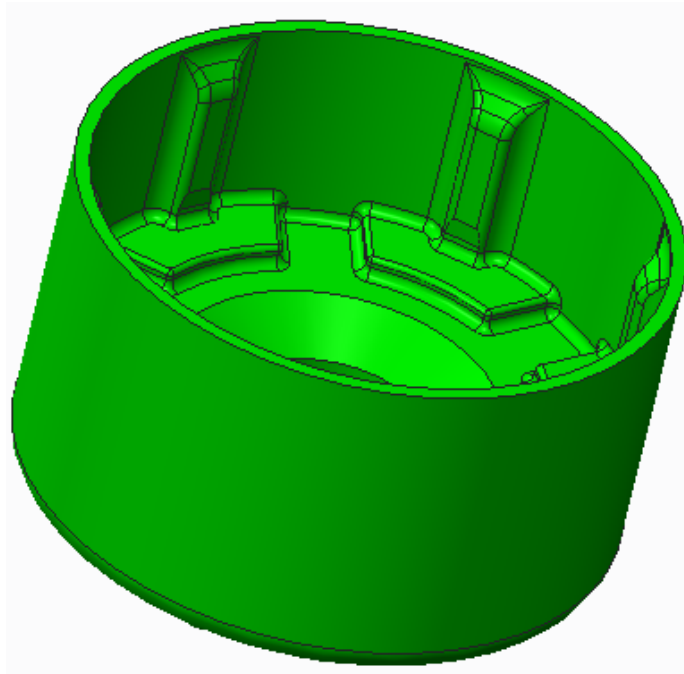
CAD model of plastic part from Hewitt Molding.
